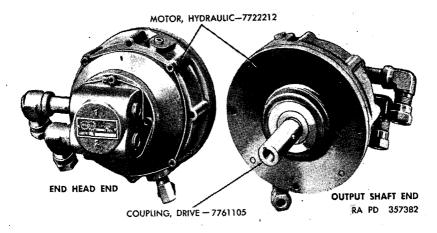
Front and rear view of constant-displacement hydraulic motor.
